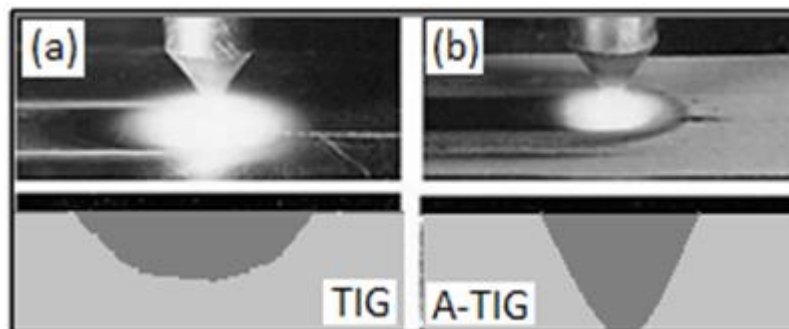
Figure A-TIG Welding of 304 L stainless steel pipe
